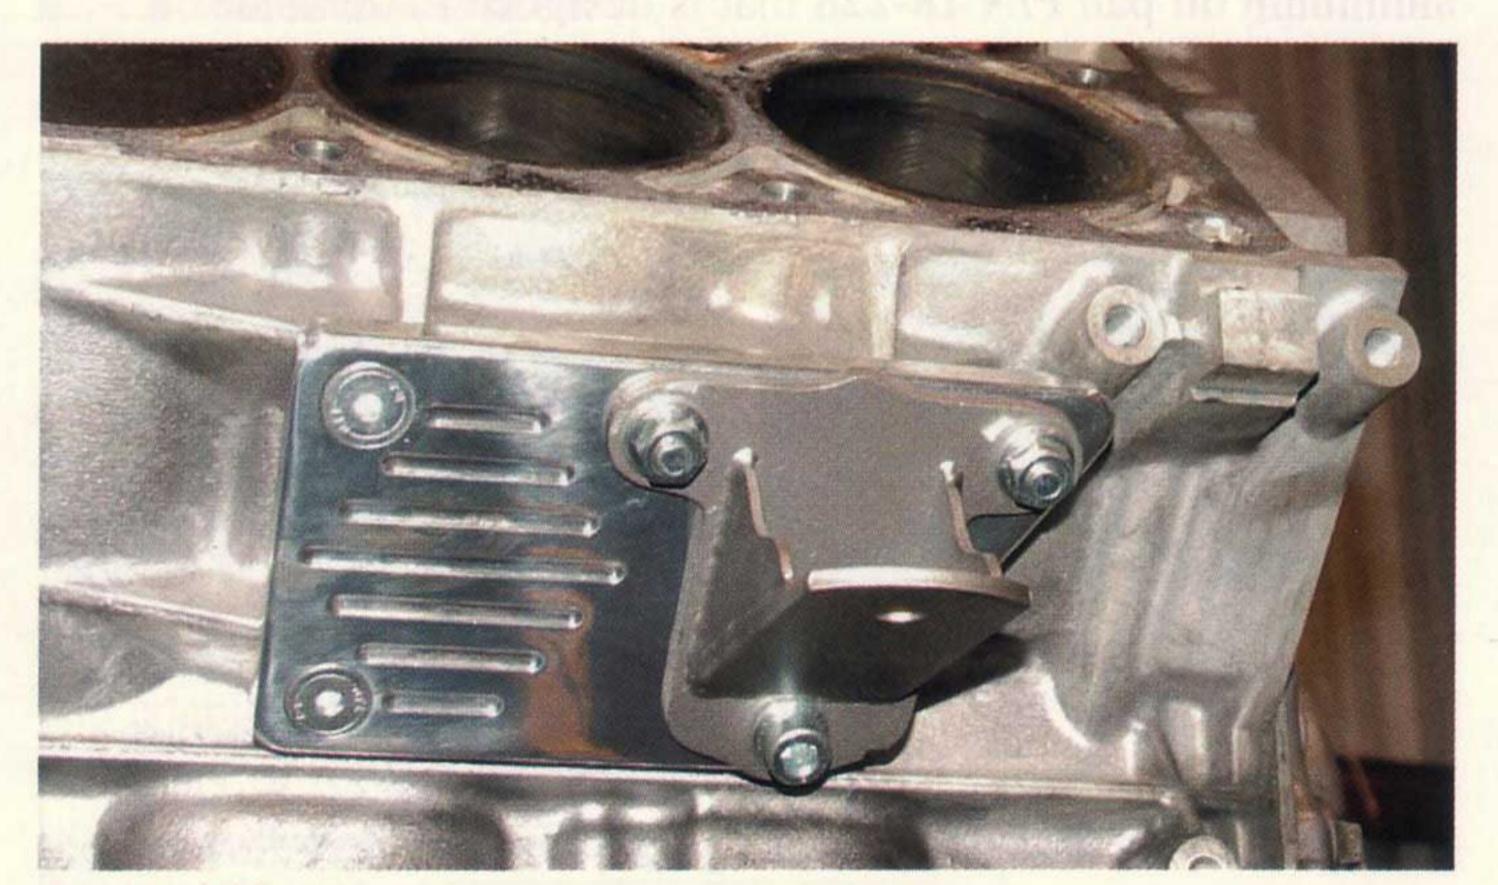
The early style (pre-1997) side engine mount P/N 18-02 is held to the adapter plate with two lock nuts at the top of the plate and one Allen head bolt at the bottom. The lower Allen head bolt will pass through the adapter plate and screw into the lower forward hole on the side of the engine block.
